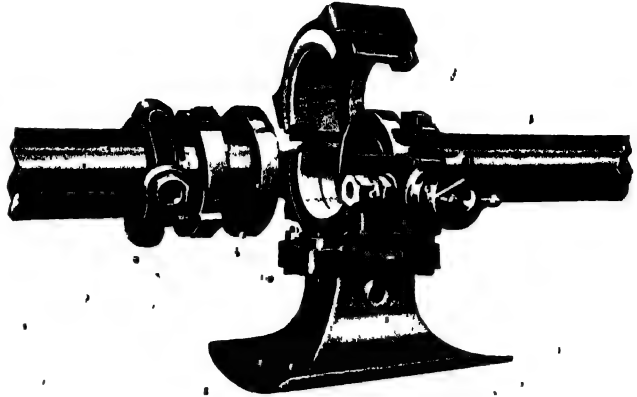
Piston-rod Coupling with Cover lifted and Rods separated
